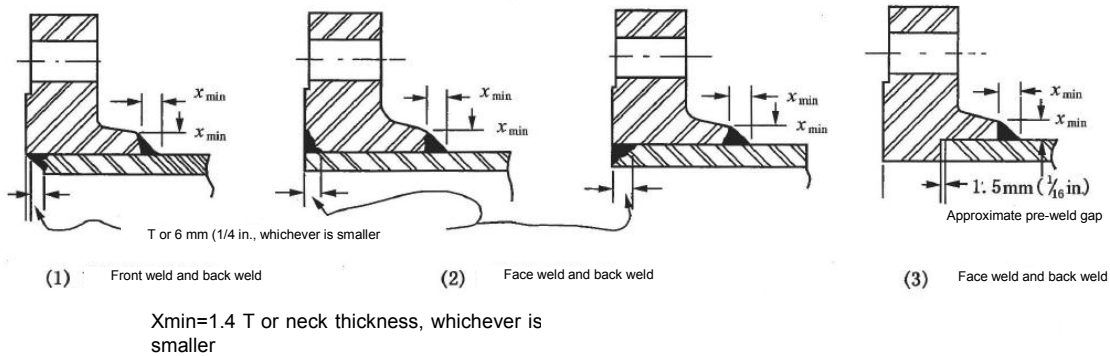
(1) Typical weld details for double-side slip-on welded flange and socket welded flange
